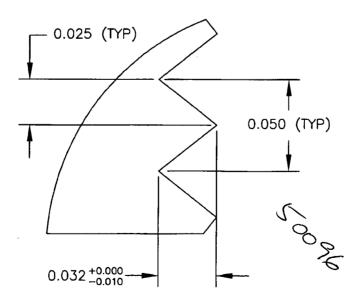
DETAIL A: SCALE 2:1 VIEW ROTATED
